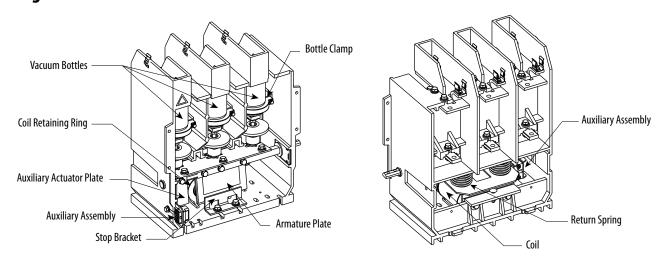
Bulletin 1502, 400 A Mechanical Latch Assembly
